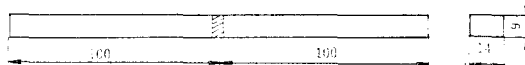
Transverse free bend test specimen of in-air welds and underwater welded joints
